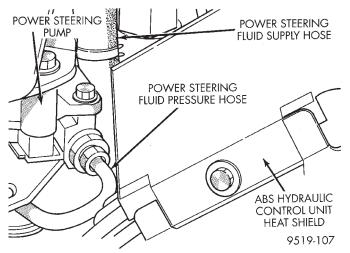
Power Steering Pressure Hose Attachment To Pump W/O Variable-Assist Steering
